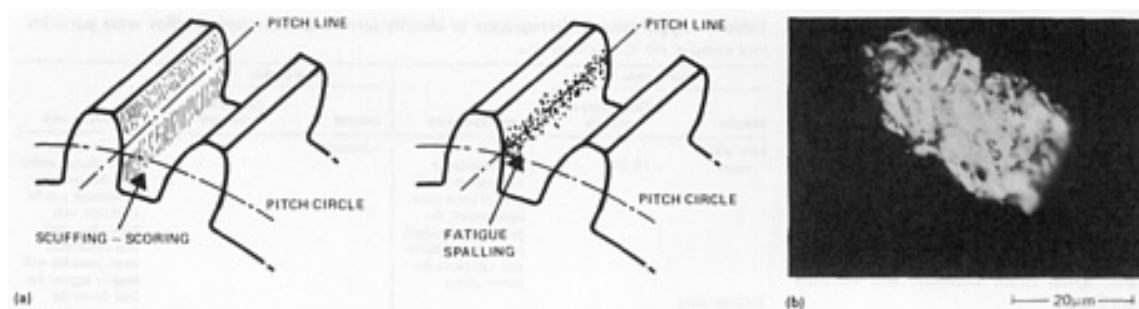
(a) Gear failure. (b) Chunky fatigue particle from gear pitch line. 1000×
